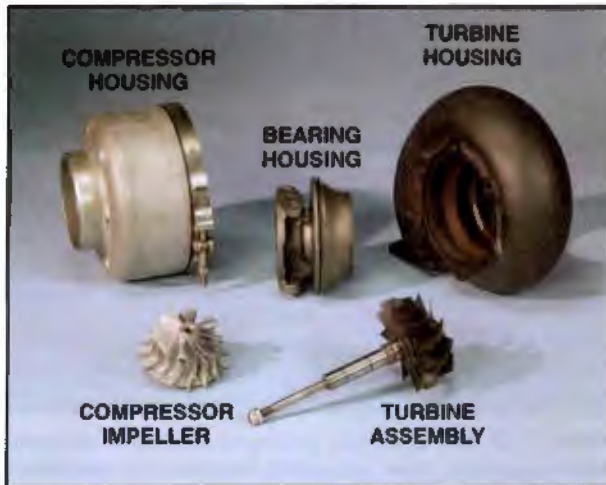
A turbocharger consists of a compressor impeller and a turbine mounted on a single rotating shaft. Both the impeller and turbine are surrounded by separate housings joined by a common bearing housing.
